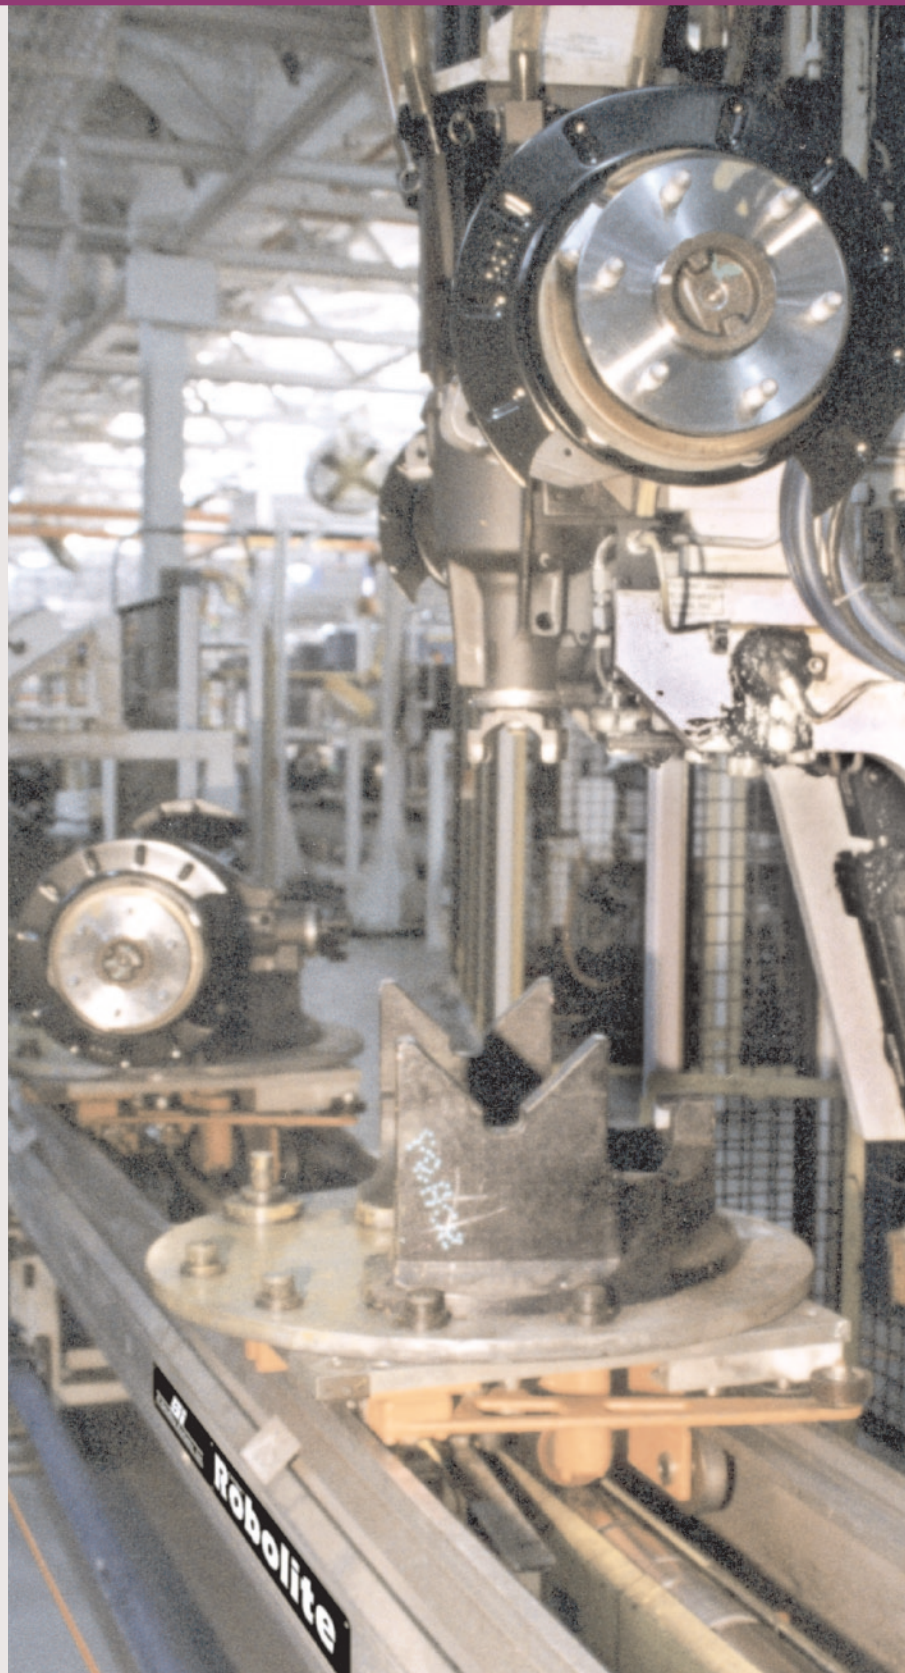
Robolite extruded aluminum track and aluminum plate carriers are used in this axle assembly installation where empty carriers are transferred to and suspended from inverted over-head track for return to the beginning of the assembly system.
